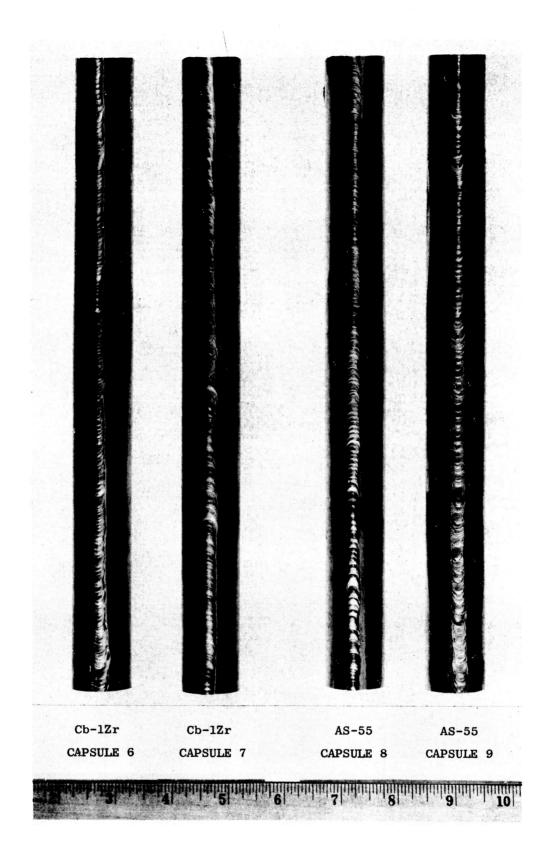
Formed and TIG Welded Reflux Corrosion Capsules of AS-55 and Cb-1Zr Alloys. (C2060126)
